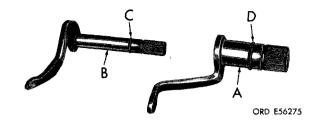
(Step 52). Separate selector shaft (A) and throttle shaft (B). Remove seal ring (C) from throttle shaft (B) and seal ring (D) from selector shaft (A).
